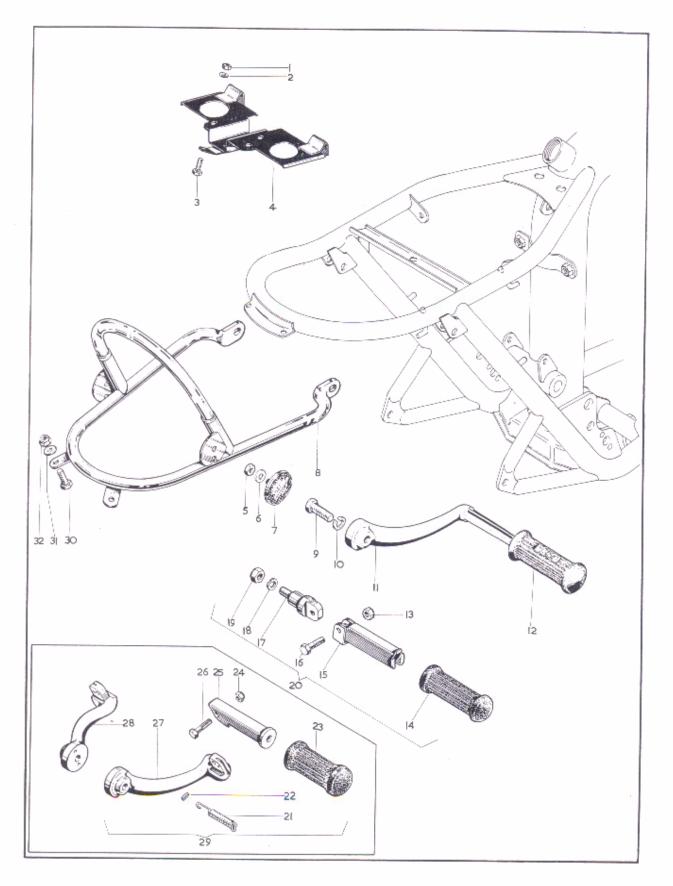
SWINGING ARM — CENTRE STAND — REAR BRAKE CONTROL
